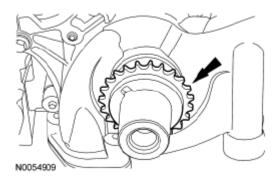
Locating Crankshaft Timing Chain Sprocket Courtesy of FORD MOTOR CO.
